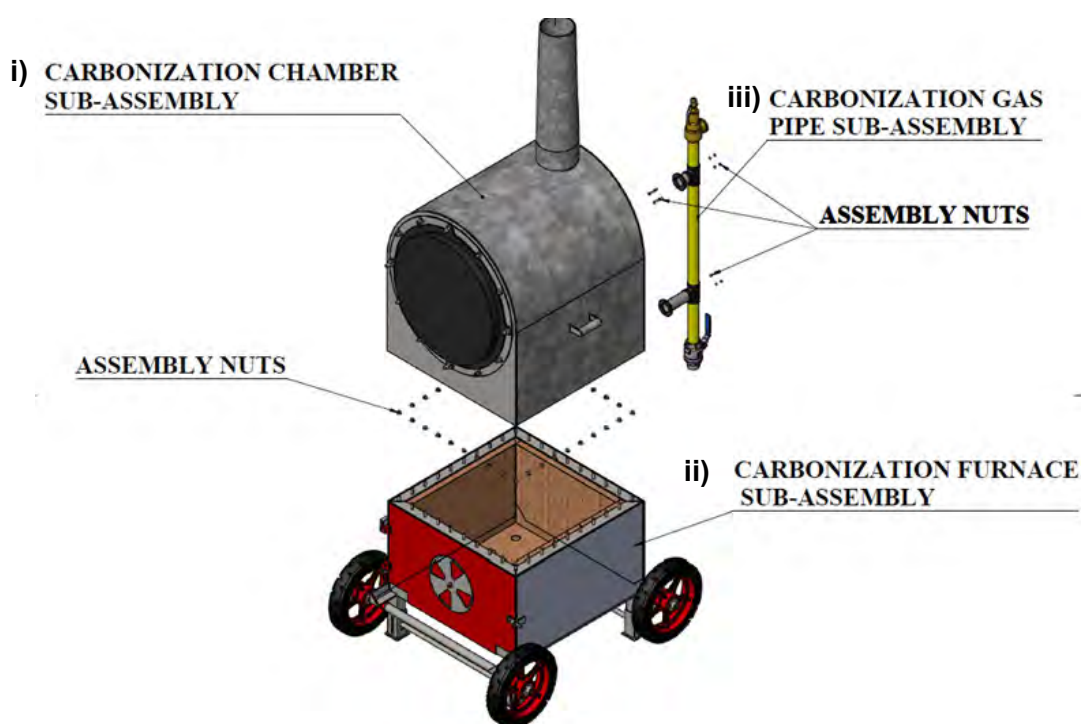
Modular design of the carbonisation unit showing three detachable subassemblies: (1) carbonisation chamber, (2) combustion furnace, and (3) gas recovery pipe assembly. The components are connected using standard assembly nuts, allowing for easy transport, on-site installation, maintenance, and scalability.
